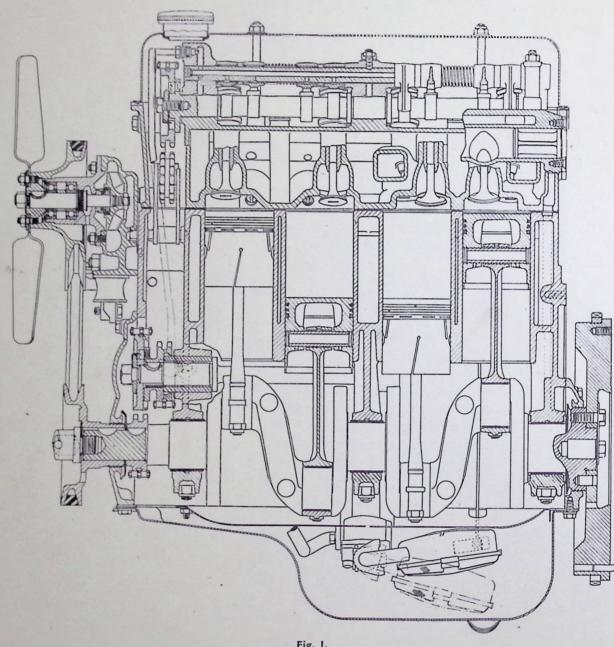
Sectional view of SM.1500 Engine with Floating Filter fitted up to Engine No. 122U. For Basket type of Filter used on Engine No. D.123U and onwards see page BZ23, Fig. 20.
